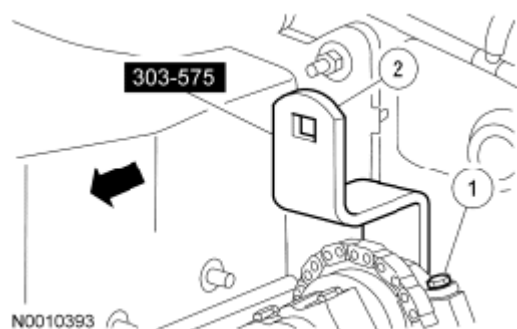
Identifying Camshaft Sprocket Holding Tool Top 2 Clamp Bolts And Torque Wrench Extension
